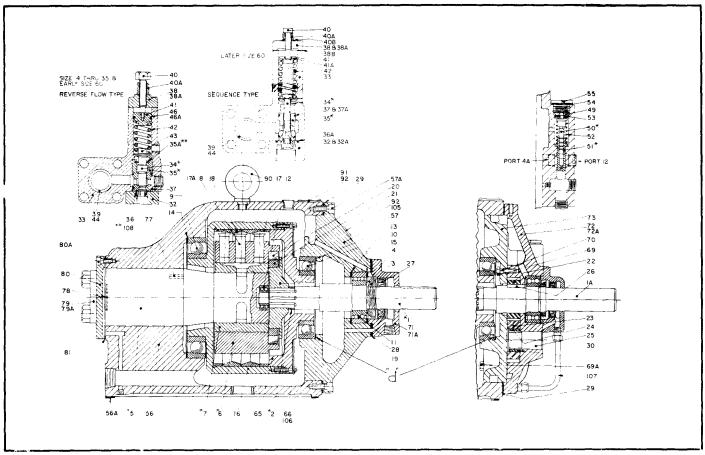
Parts Drawing, Type "C" & "CG" Pumps. DS-946000-D (58921-D).
